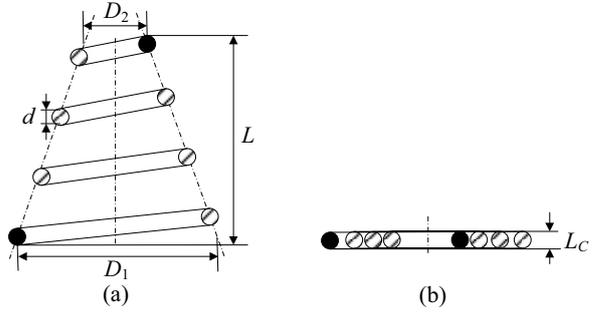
Conical spring: (a) initial state, and (b) fully compressed.
